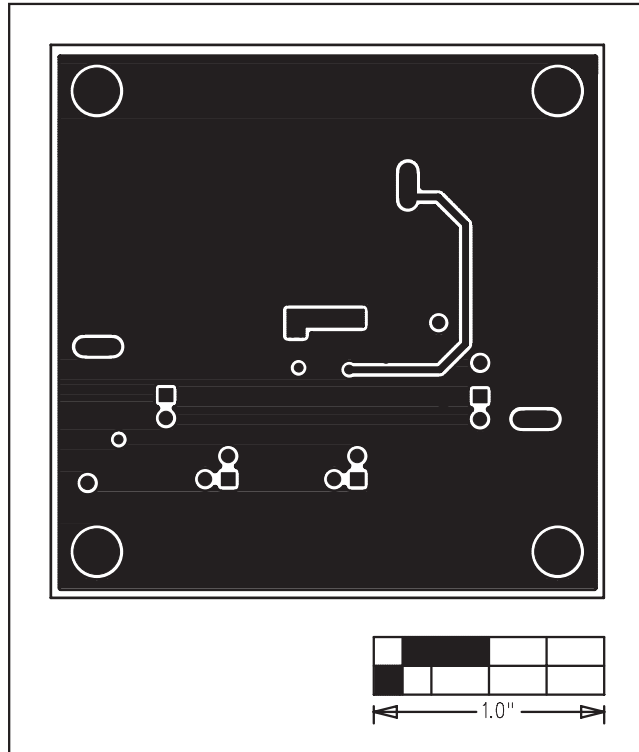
MAX17083 EV Kit PCB Layout—Solder Side
